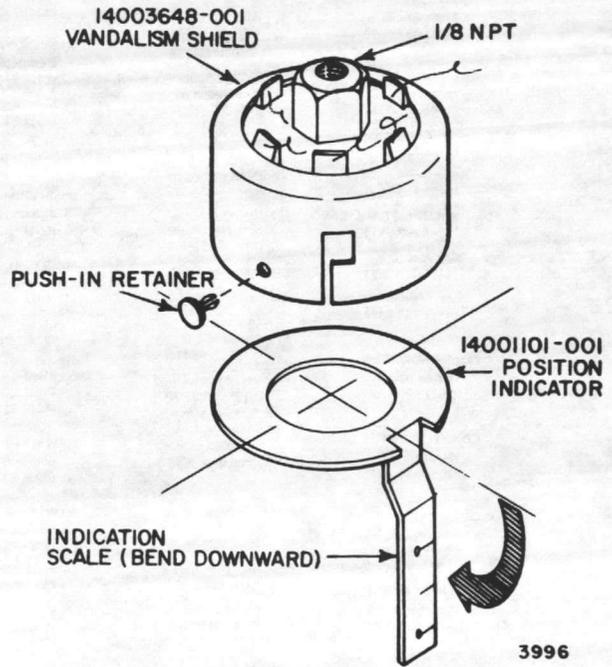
Exploded View of Parts Common to All Series VP526A Valves.
